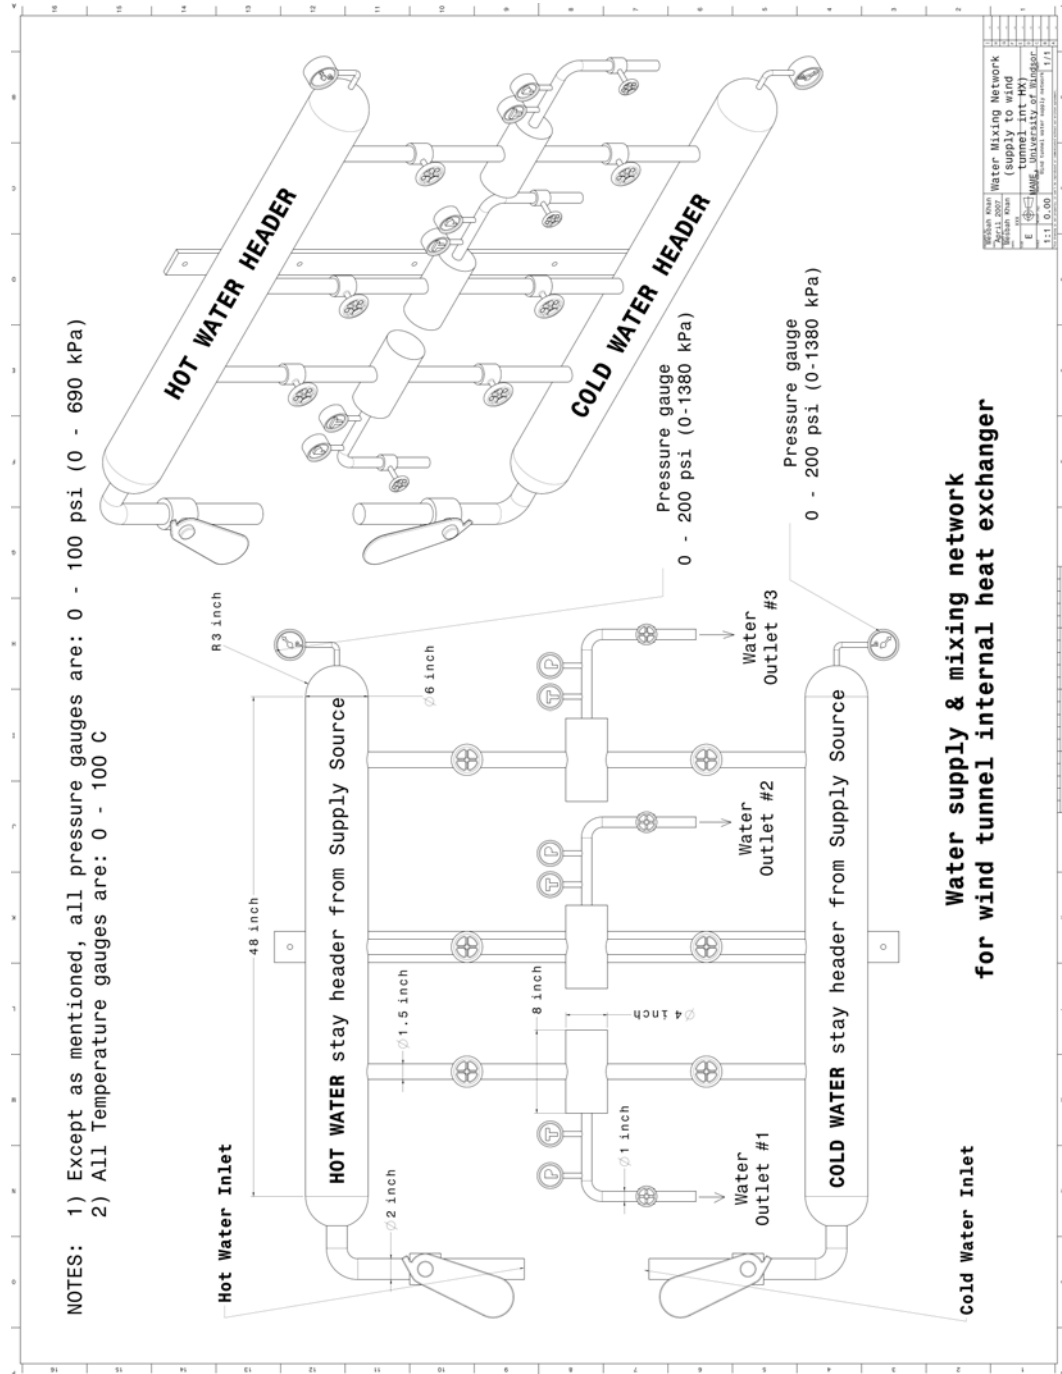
Design of water flow mixing network for wind tunnel internal heat exchanger (3D/2D)
